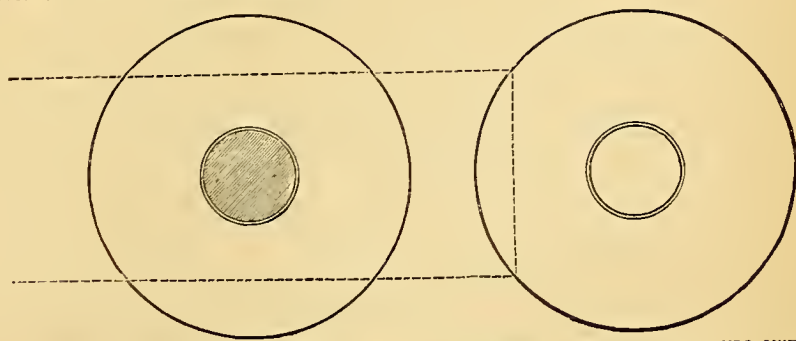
RELATIVE SIZE OF COIL BOBBINS AND THEIR CORES TO THE MAGNET. FULL SIZE.
